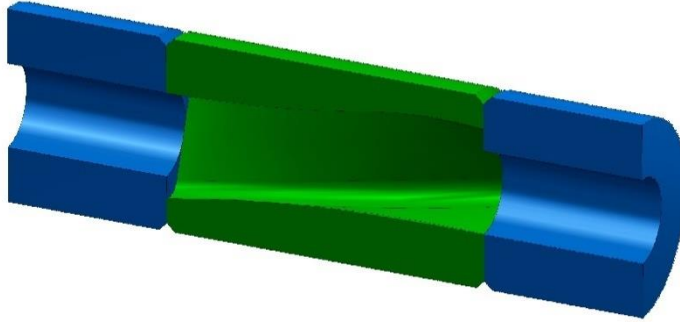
Longitudinal section of the plasticizing system equipped with a rotational barrel element with a torsional hole in the shape of a triangle, without a screw
